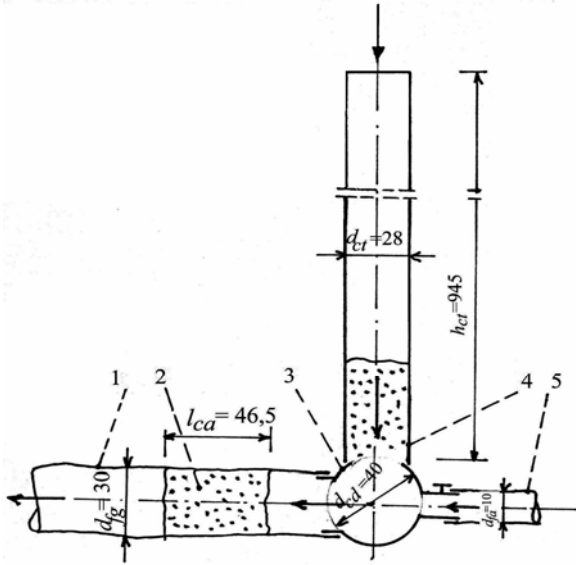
b. Cannular chamber -spherical chamber – granules+air compressed mixture hose assembly.
